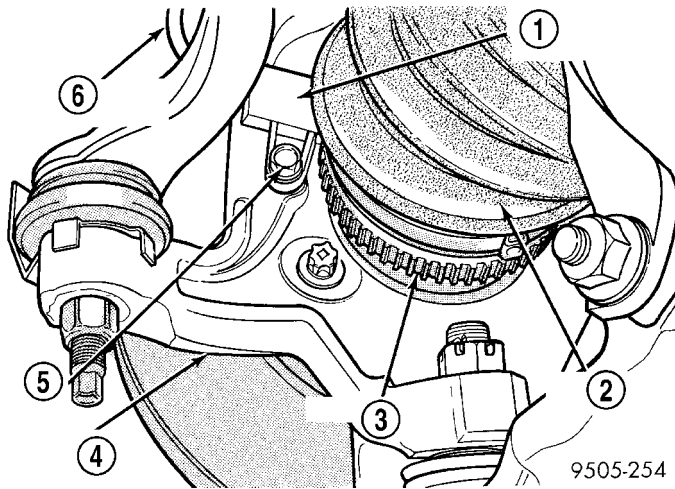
Speed Sensor Head Attachment To Steering Knuckle
